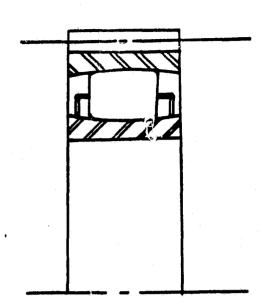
PLANET GEAR BEARING SIDE VIEW
